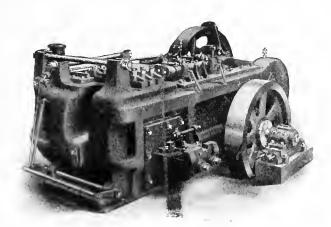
Bolt-Heading, Upsetting and Forging Machine. Built in Sizes from ¾-in. to 6-in.
